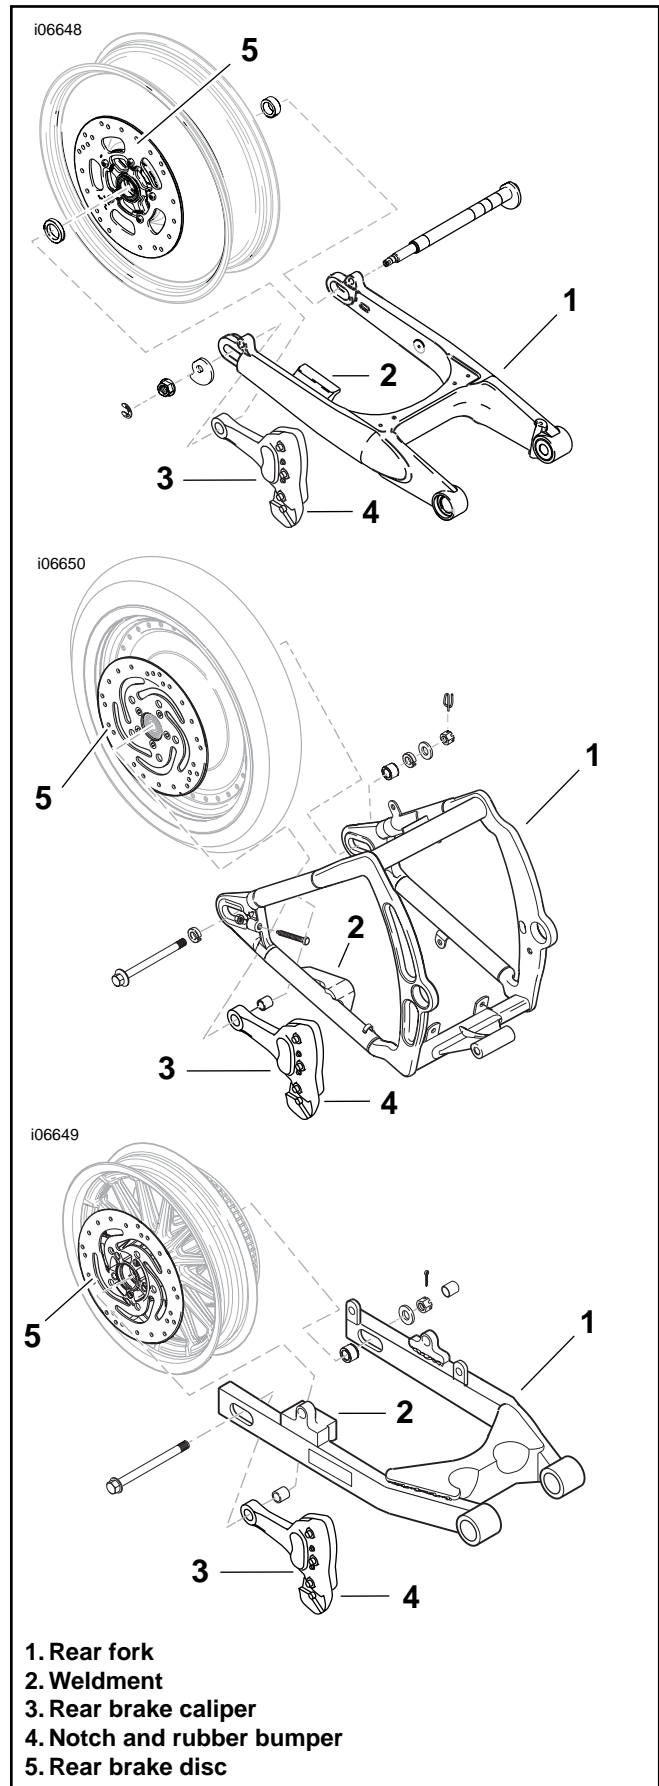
Rear Wheel, Axle, and Caliper Assembly
